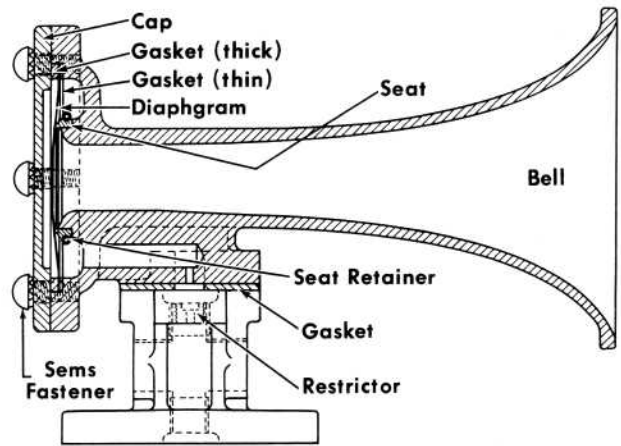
Cross-Section Nathan "P" Type Air Horn
